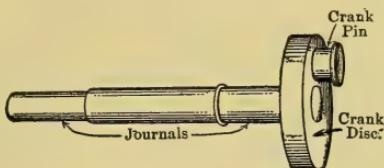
Crank Shaft and Disc, Overhung Crank.
